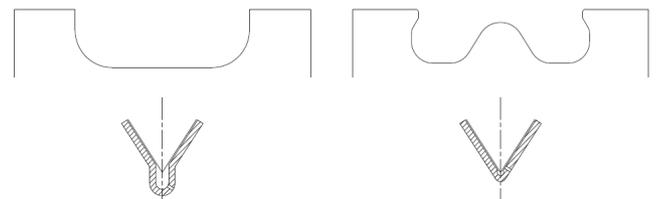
Geometry of the combustion chamber and the nozzle endings; standard version – left, modified version – right [11]
